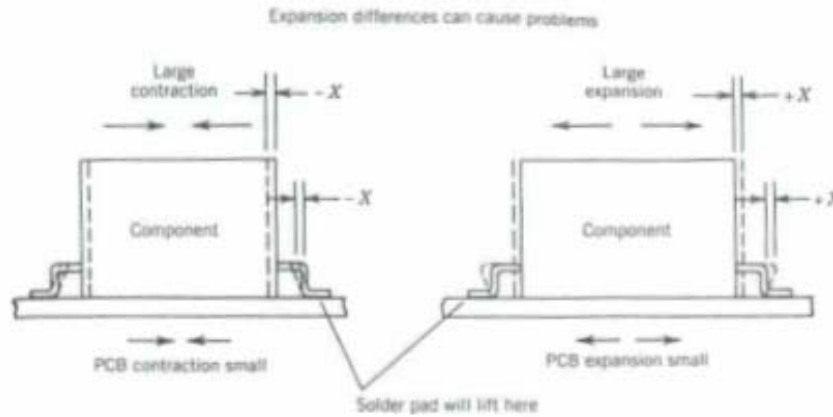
Surface mounted transformer where differences in expansion produce bending in the lead wires
